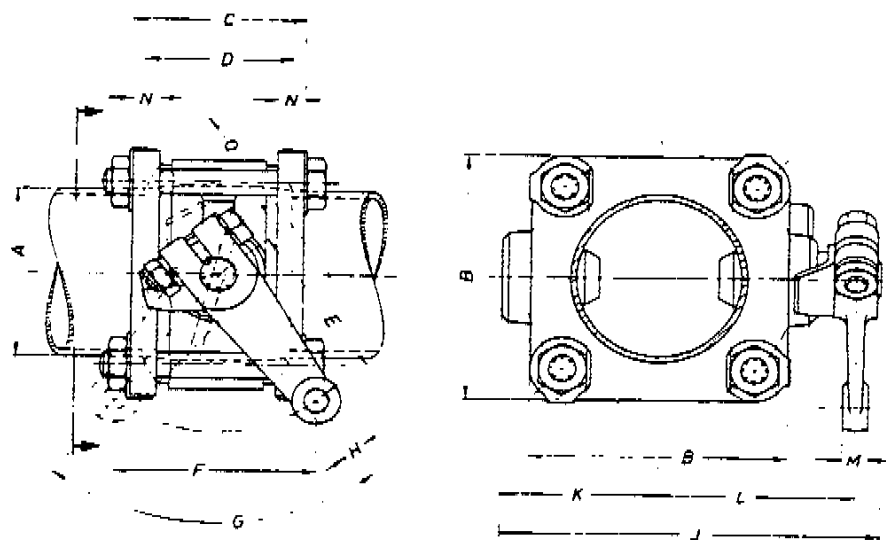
Z.F. Exhaust Compression Brake With Full Closing Flap (for operation by a mechanical linkage) [4.5].
